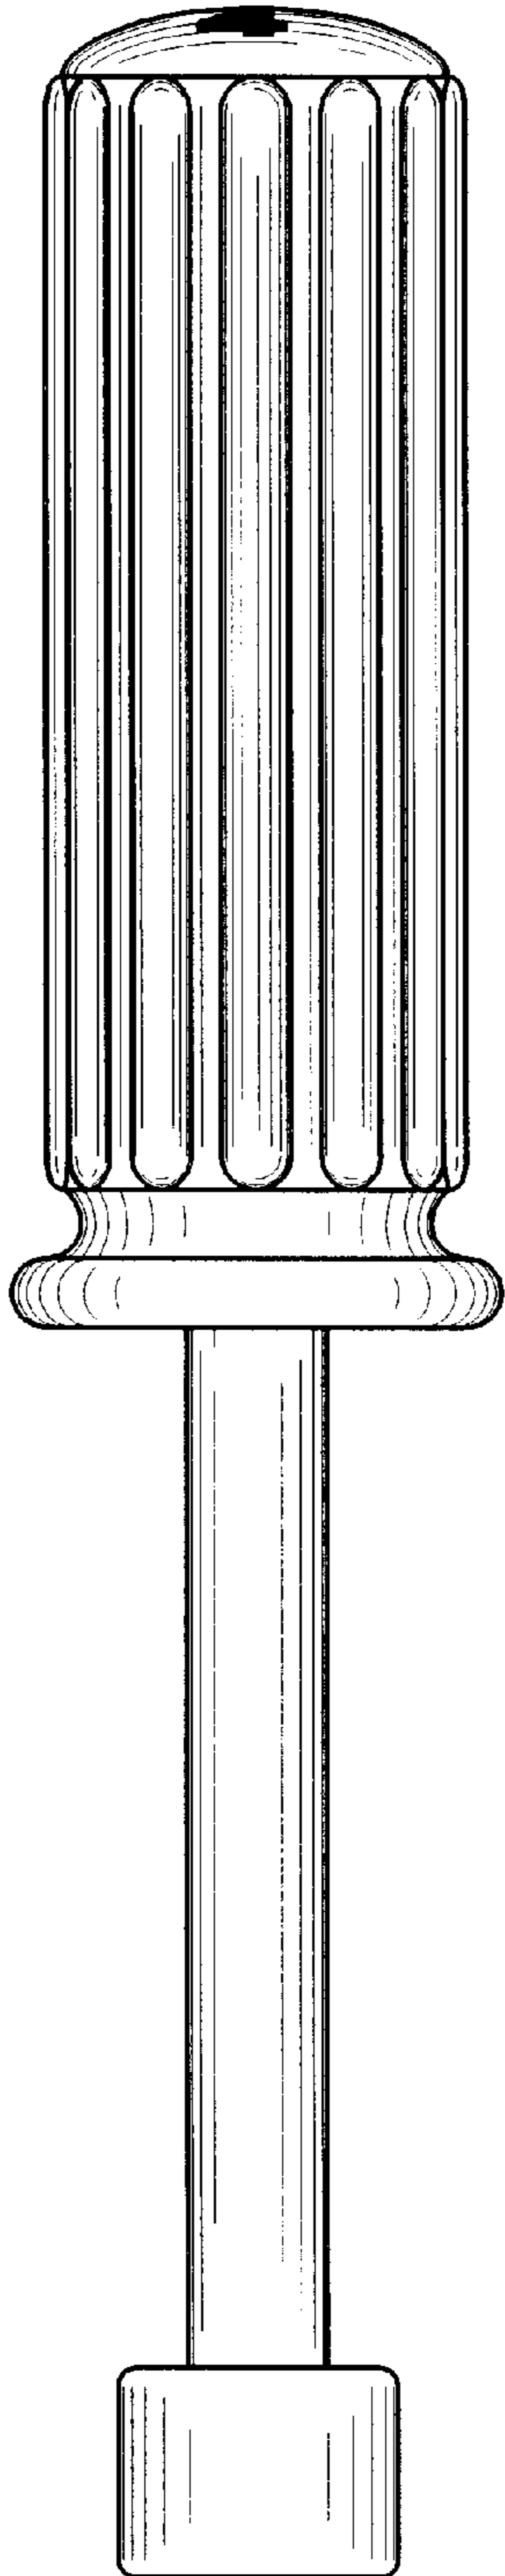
is a right side elevational view of the socket driver of FIG. 1;
